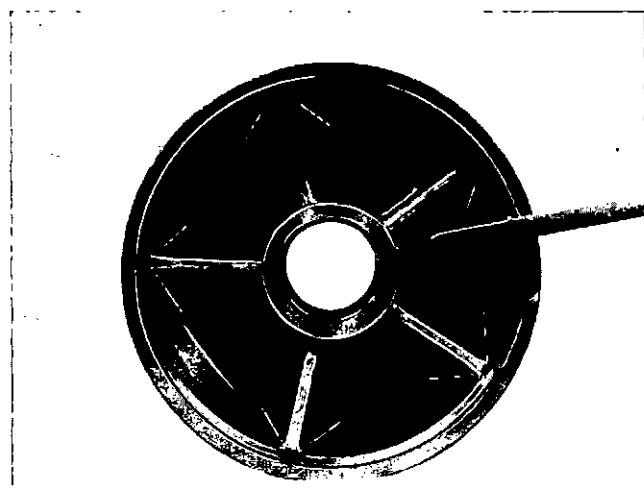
, (T465069). Inspect the bearing housing
